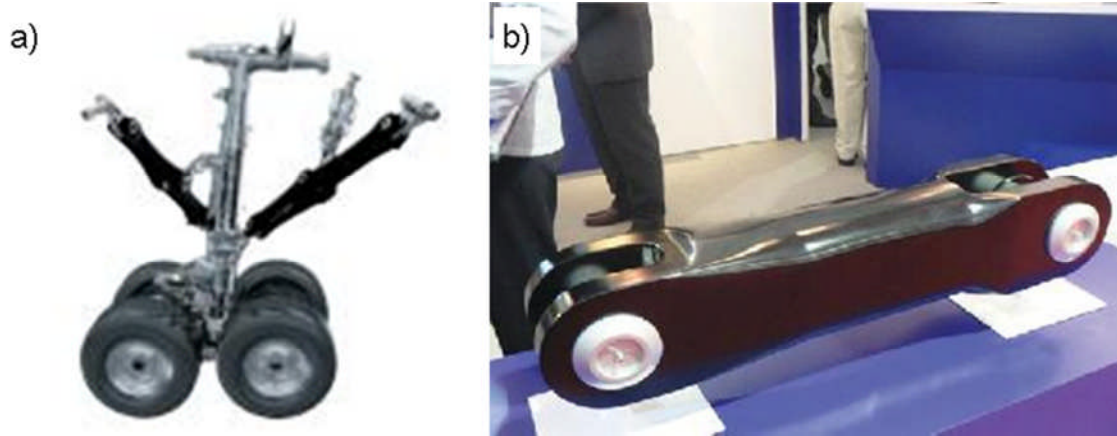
Landing gear braces: a) black coloured parts and b) real size at an exhibition, adapted from [277].
